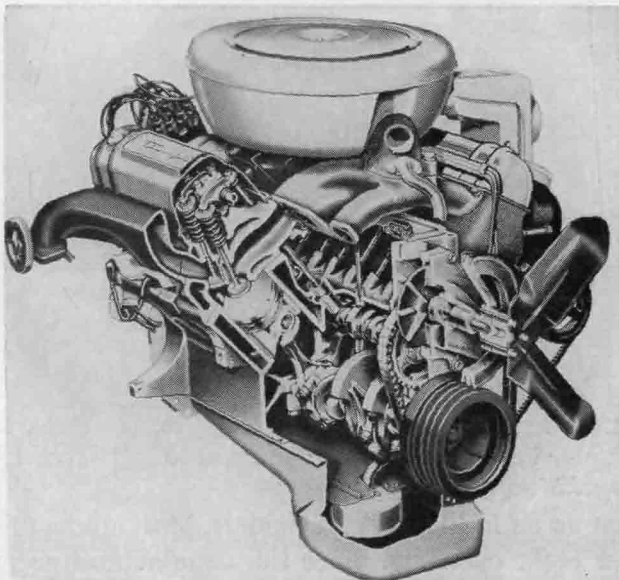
Cutaway view of an eight-cylinder V-type engine. (Mercury Division of Ford Motor Company)
